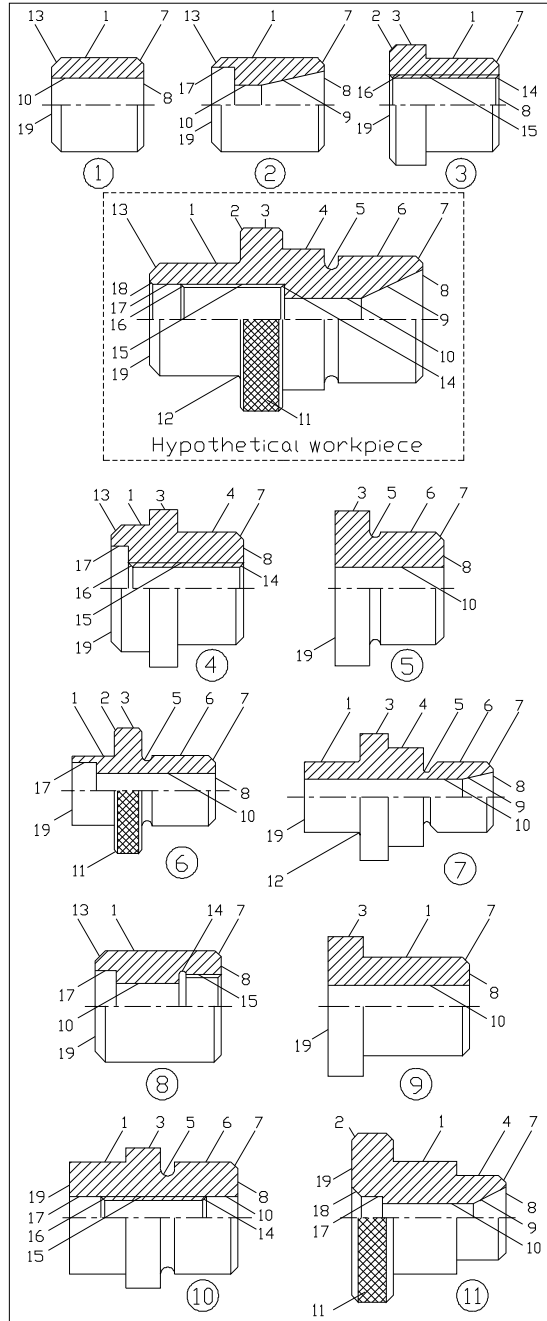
The example of a group of workpieces and a hypothetical complex workpiece
